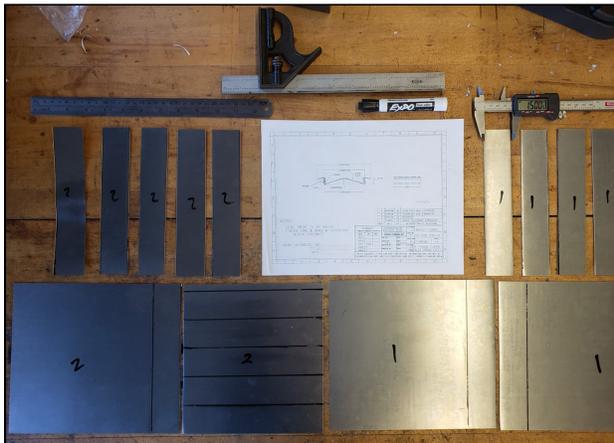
Display of equipment used and the sheared pieces of sheet metal
